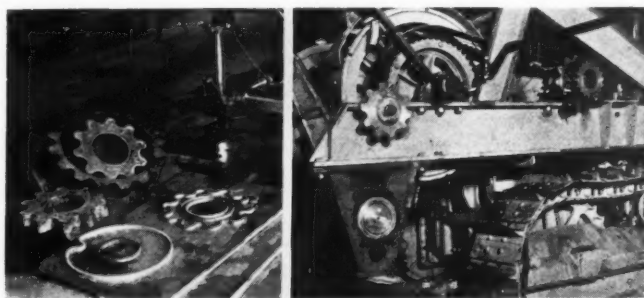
Intricate shapes such as these can be cut with the torch and applied directly in the machine
